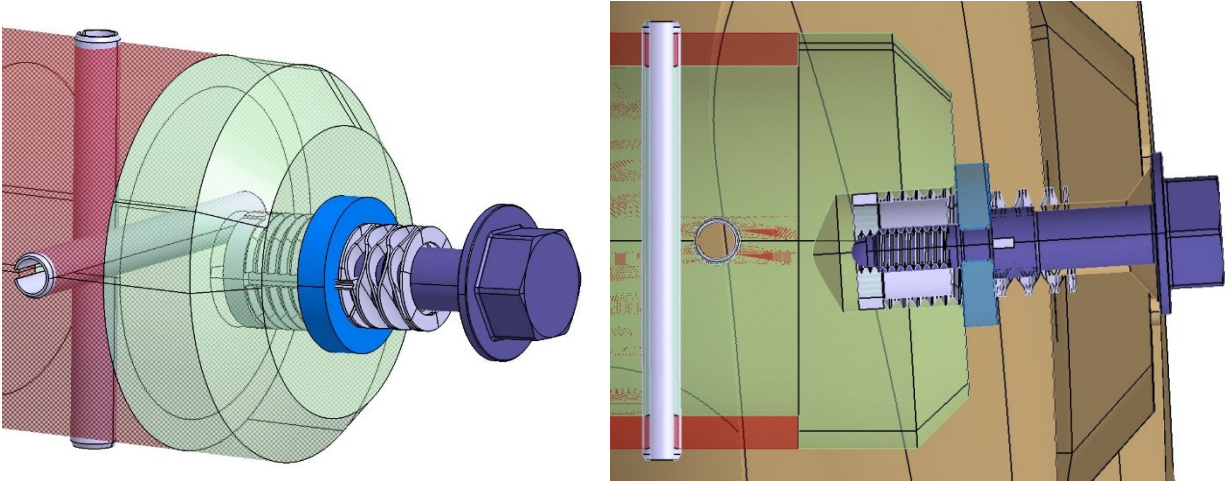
Detail view (left) and section cut (right) of shoulder bolt, wave spring, threaded washer, and floating Keensert assembly
